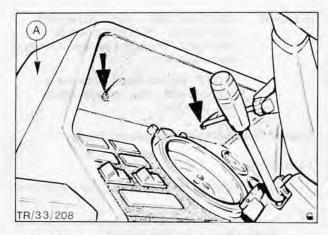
Removing housing shroud. Retaining screws arrowed A – Shroud
